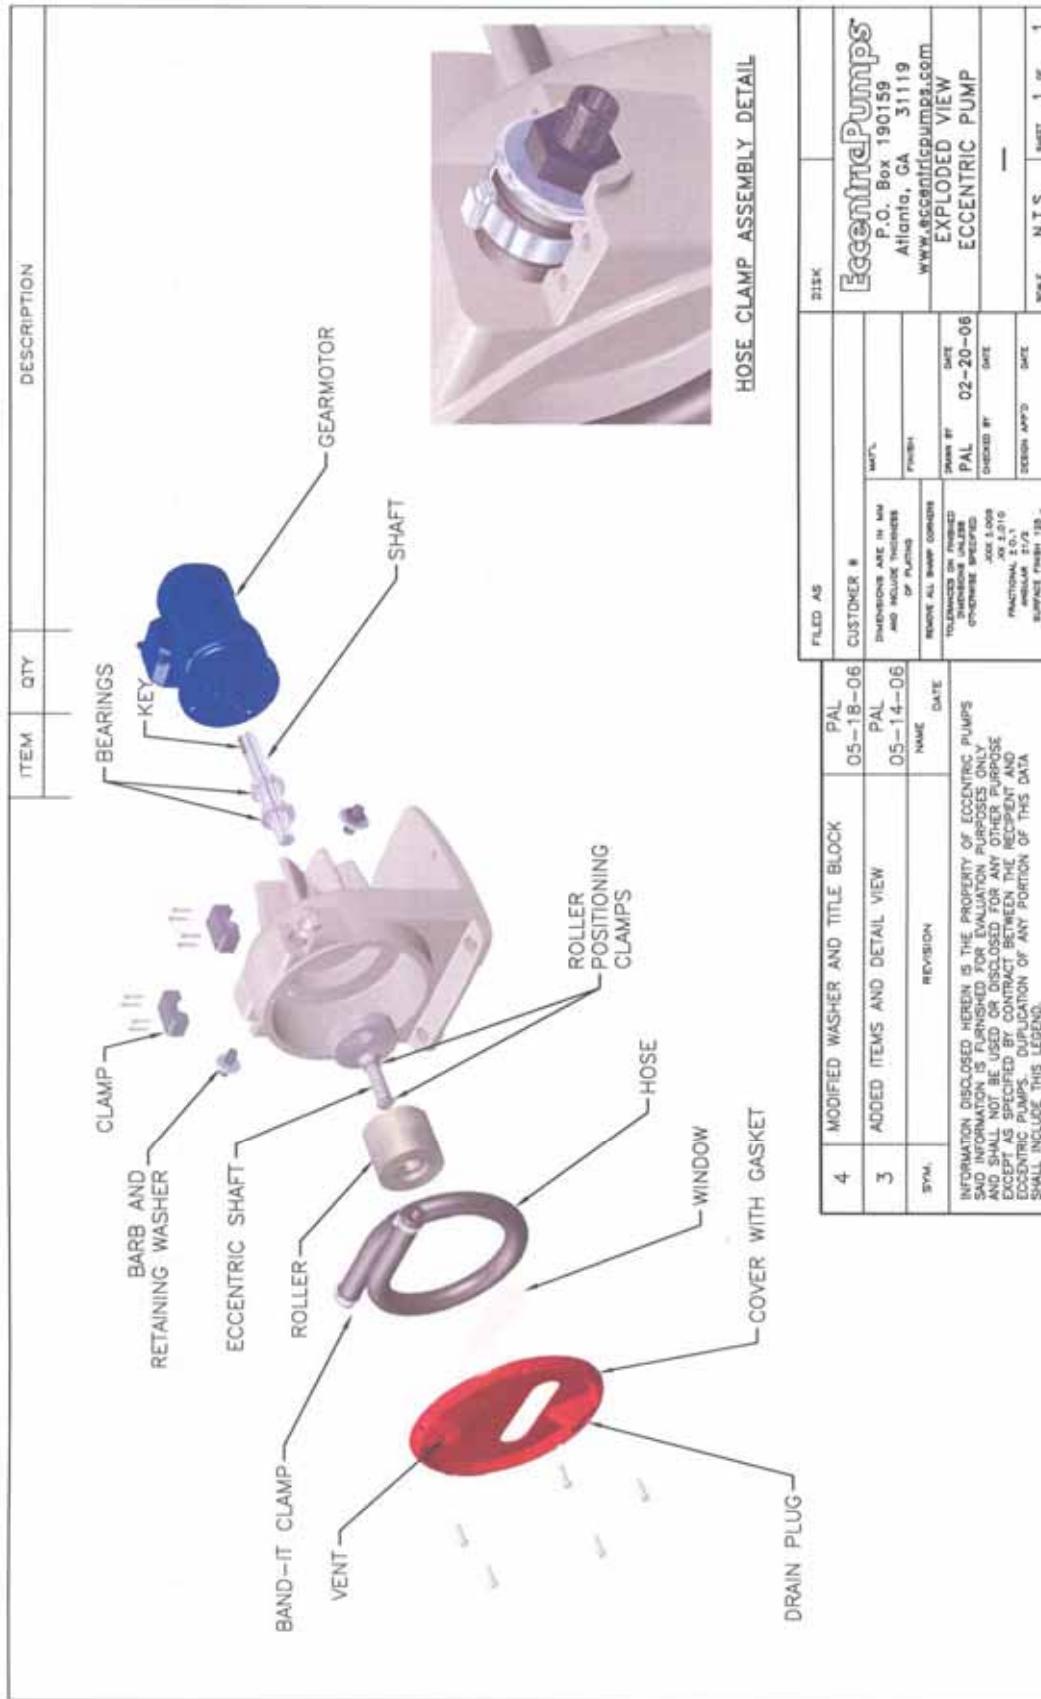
Exploded View of Major Pump Parts. Some Small Parts Are Not Shown.
